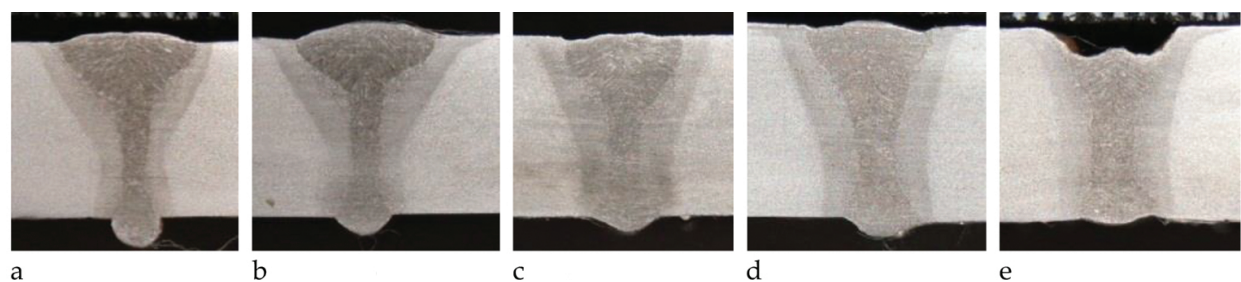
Weld macrosections with different gap width: a – 0 mm; b – 0.3 mm; c – 0.6 mm; d – 0.9 mm; e – 1.2 mm.
